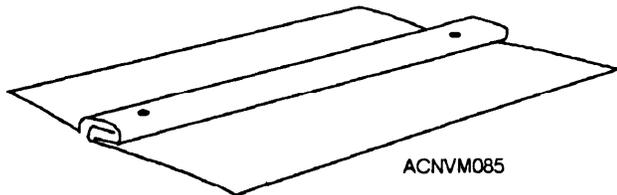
Grooved seam locked with prick-punch indentations.
